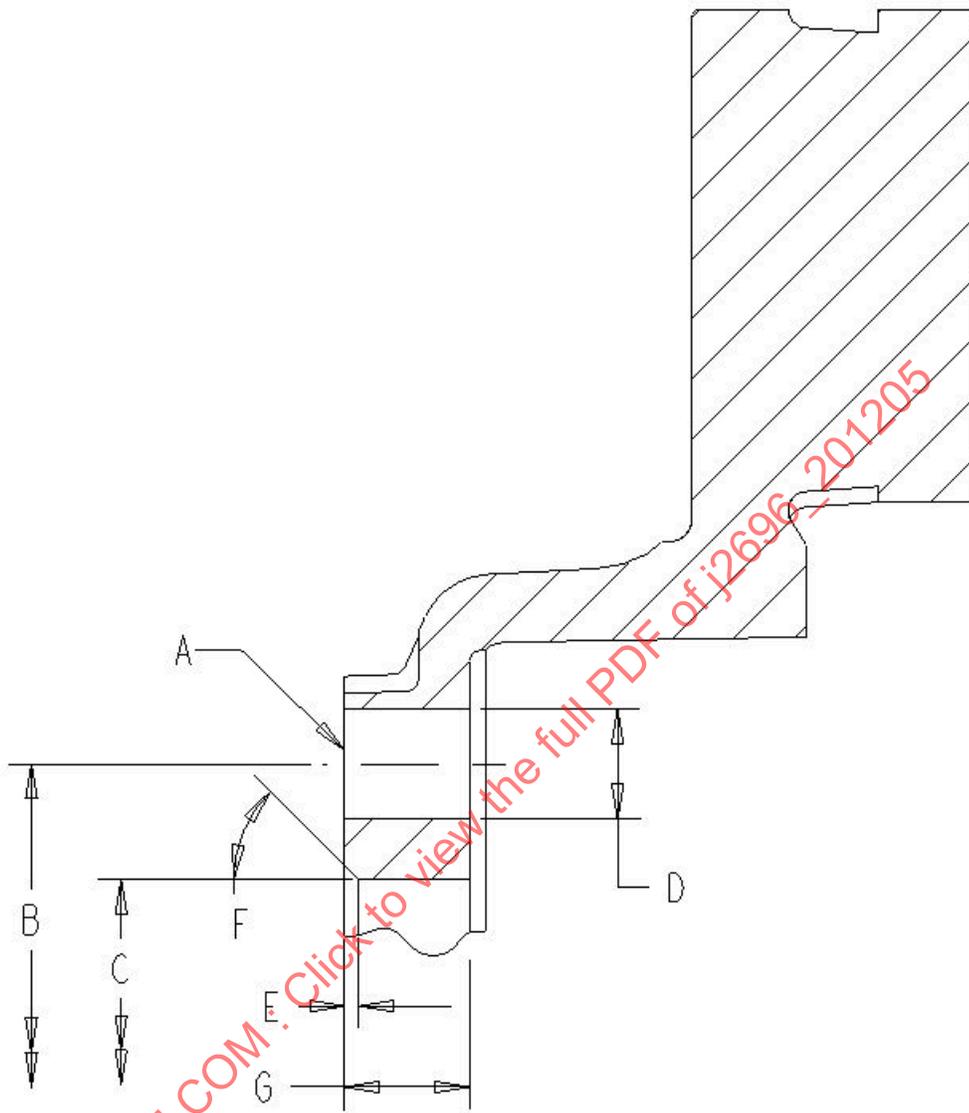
ROTOR INTERFACE DIMENSIONS - HAT SECTION ROTORS
